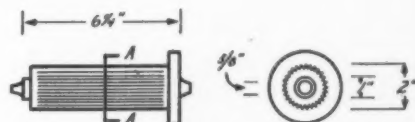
A piece of machinery originally made of hardened tool steel and bronze bushed with oil grooves, was redesigned for production as a chilled iron casting with a gray iron bushing replacing the tool steel part with the bronze bushing. Thus a new use for cast iron was developed.
